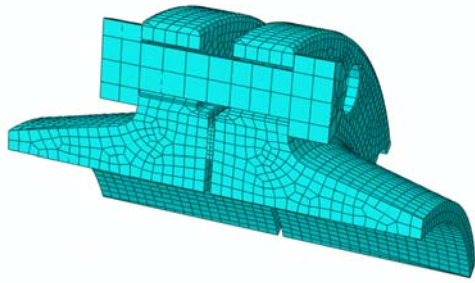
Typical Finite Element Mesh of 3-Bolt ANSI Flange Assembly
